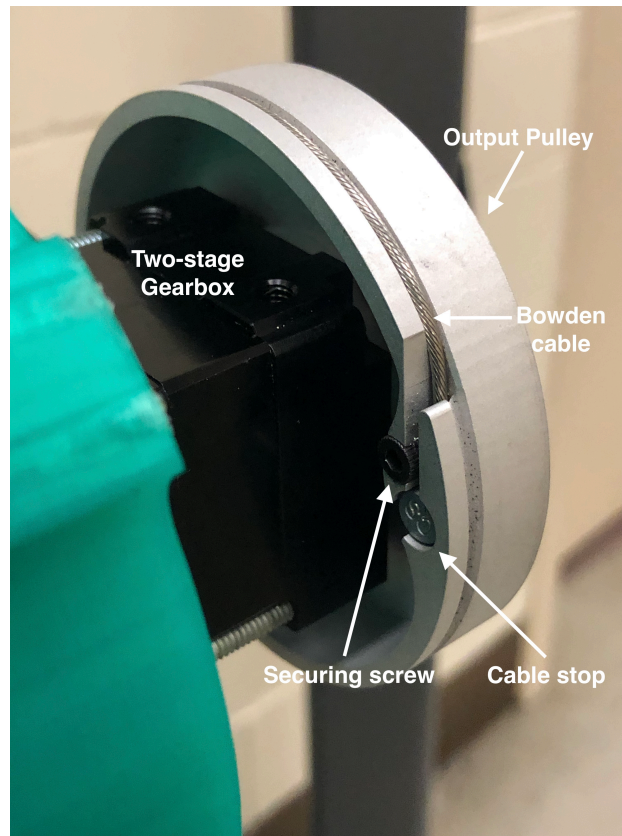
Bowden cable attachment mechanism to gearbox output pulley
